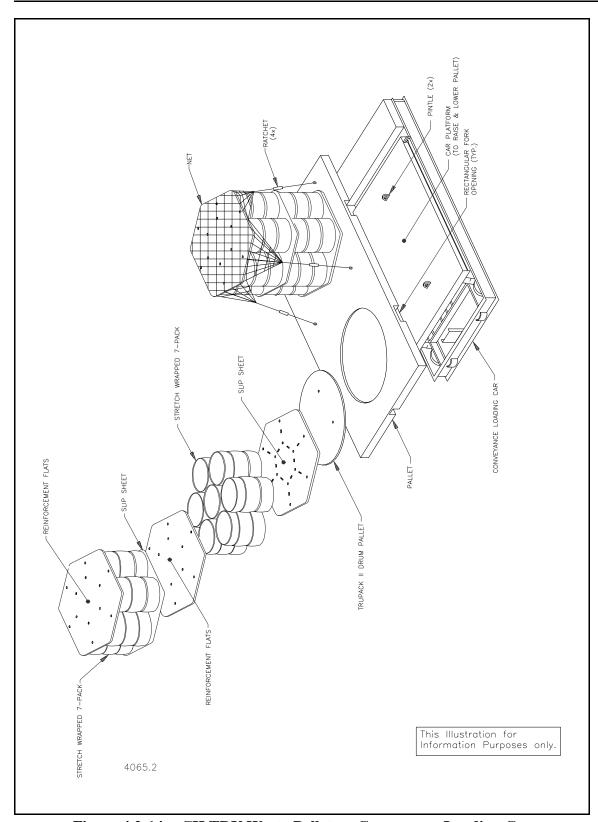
, CH TRU Waste Pallet on Conveyance Loading Car
